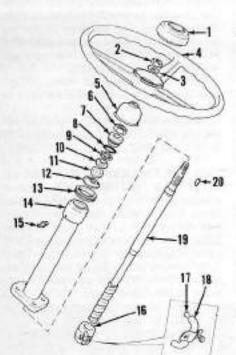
Exploded view of steering column and related parts for 1190 models with manual steer-
